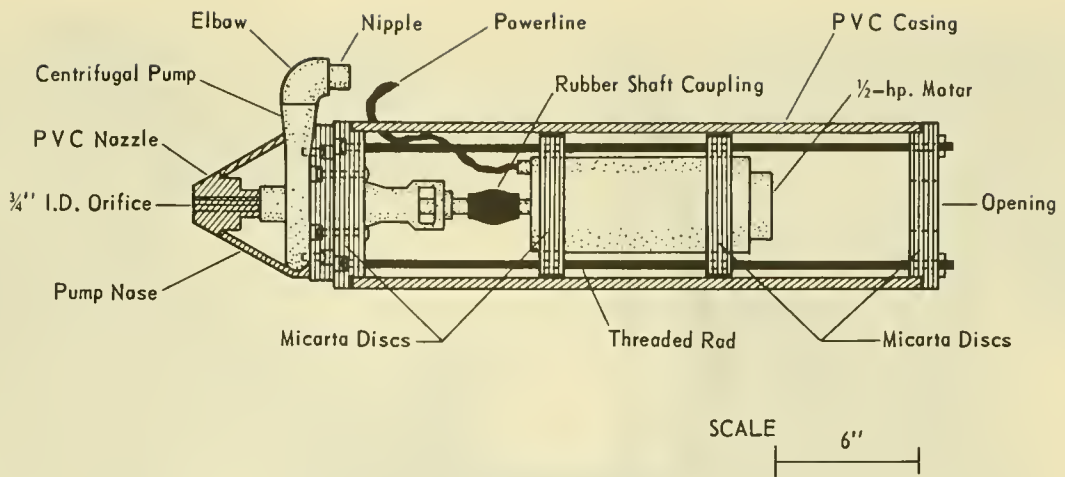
Schematic drawing of the collector with the outer casing cut away.
